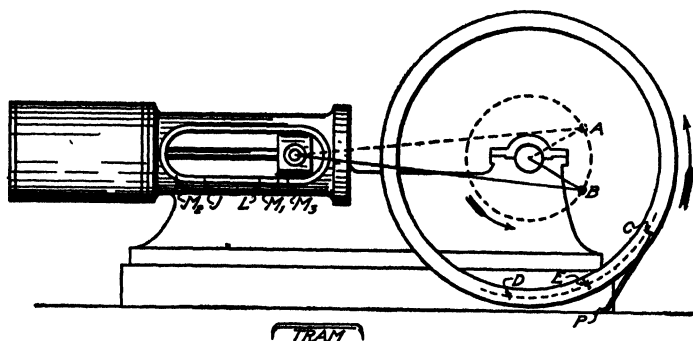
Sketch of Engine, Showing Method of Putting Engine on Center
